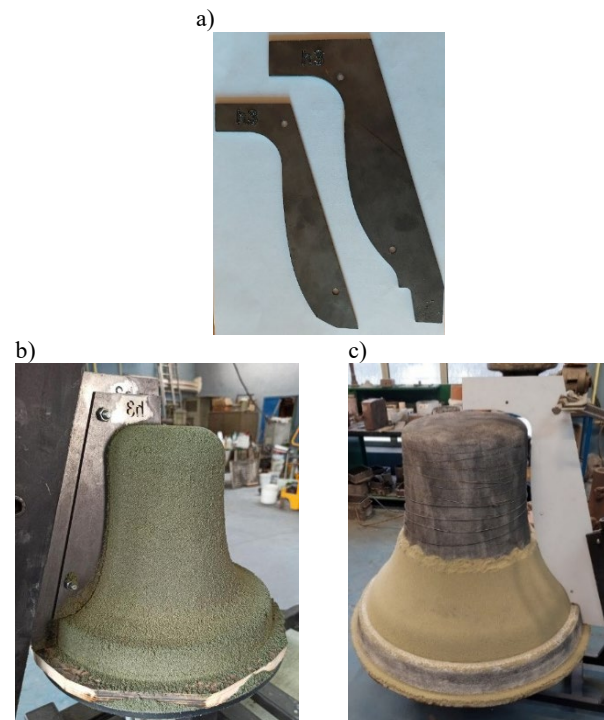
Strickle board (a) and steps of the mold making process (b) &(c)
